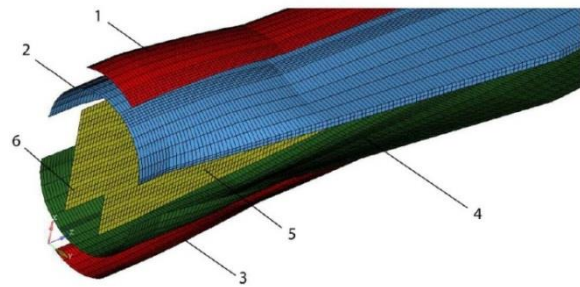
FE-model: Exploded assembly of a WTB [5]
